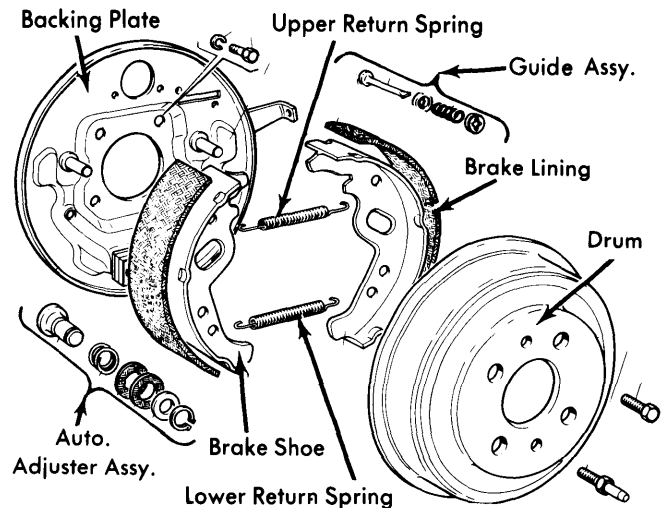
Typical Rear Drum Brake Assembly (128 Model Shown)
